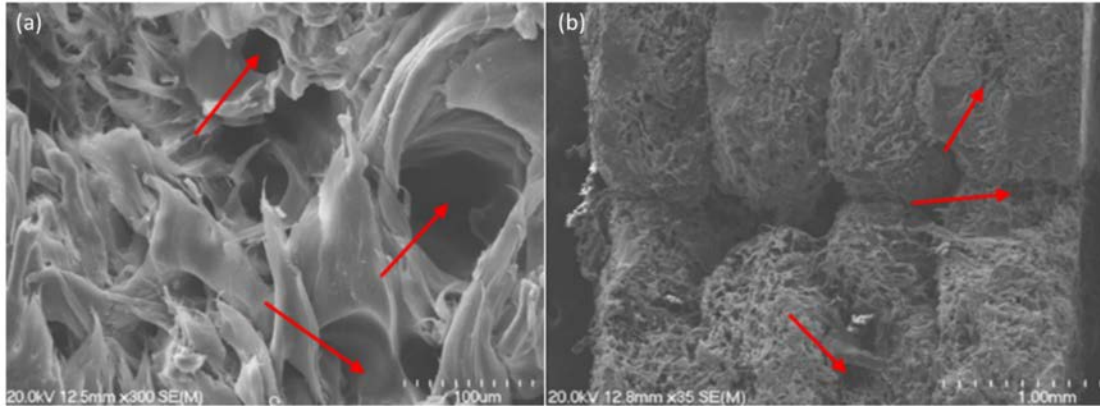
Fracture surface of polypropylene/flax composites with 10 % wt. (a) and 30 % wt. (b) of short fibers showing excessive porosity and large gaps between printed beads and layers [275].
